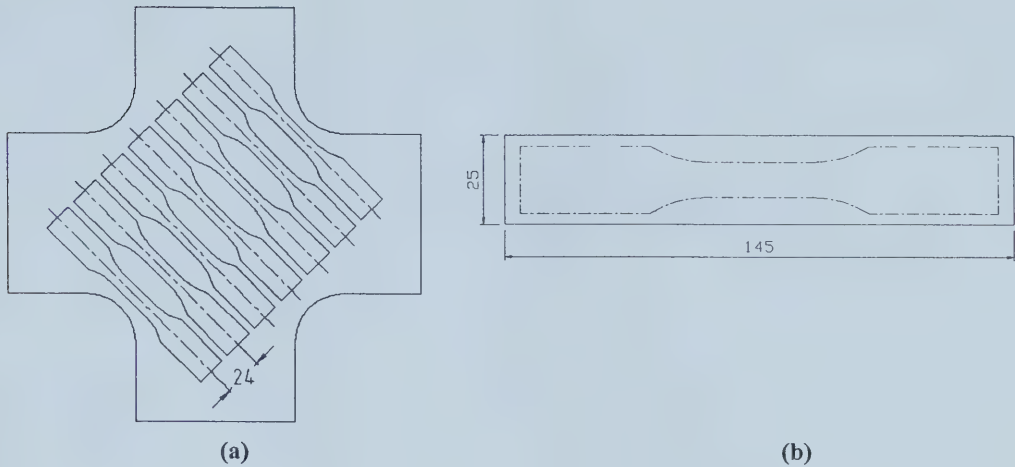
Cutting plan of (a) cruciform specimen, and (b) strip specimen.
